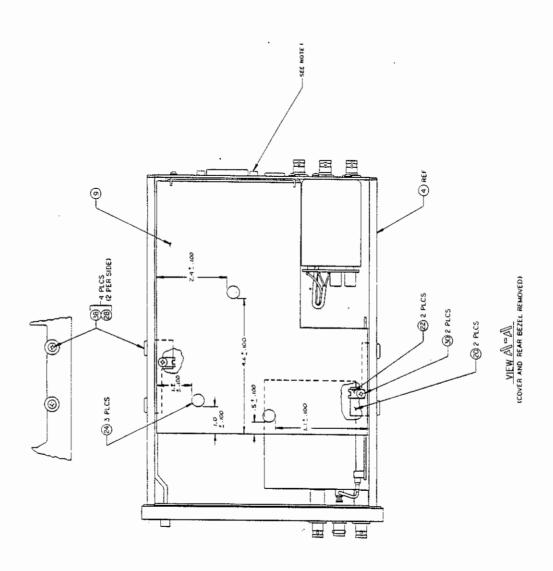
A - Final Assembly 404503 Rev. C (Cont'd)
